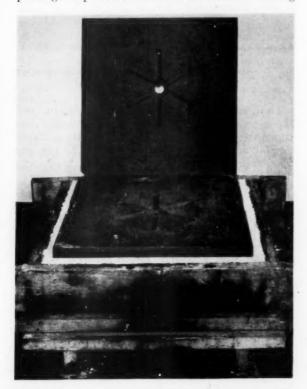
Cylinder test casting mold showing runner slab before closing.
